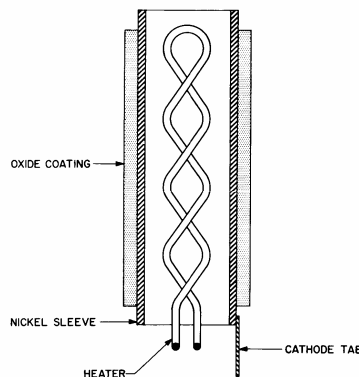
Typical indirectly heated unipotential cathode assembly. The twin-helix heater winding was used in low-level tubes specified for low-hum.
